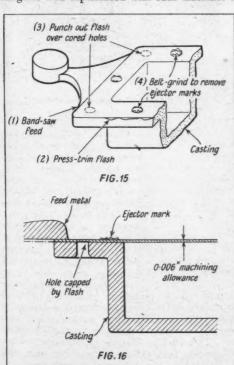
Four secondary operations are required on this die cast aluminium housing
